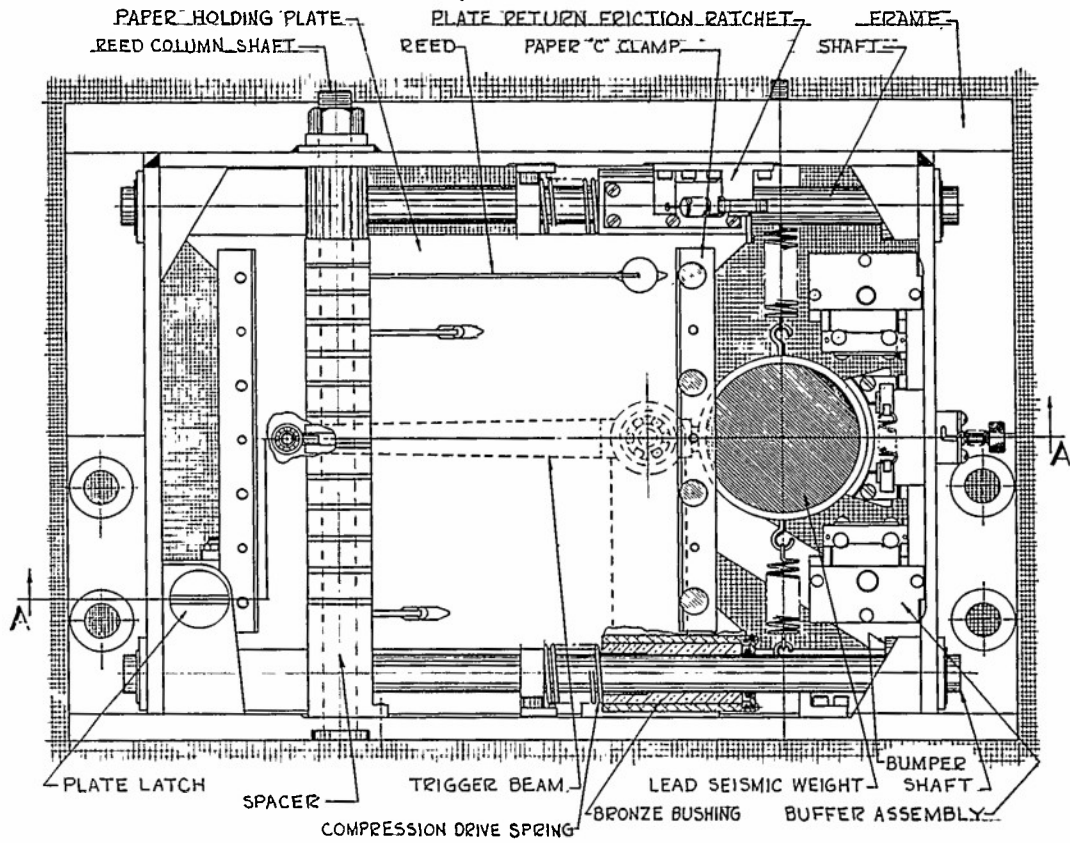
Schematic Drawing of Reed-Type Shock Gage in Cocked Position
